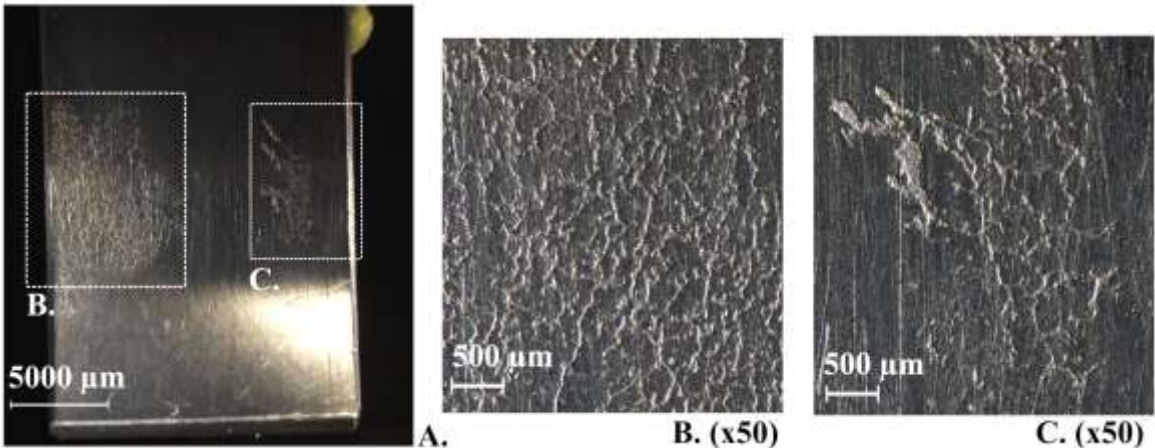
Fatigue wear on lower bearing shell. BLUE bearing. Zeiss microscope
